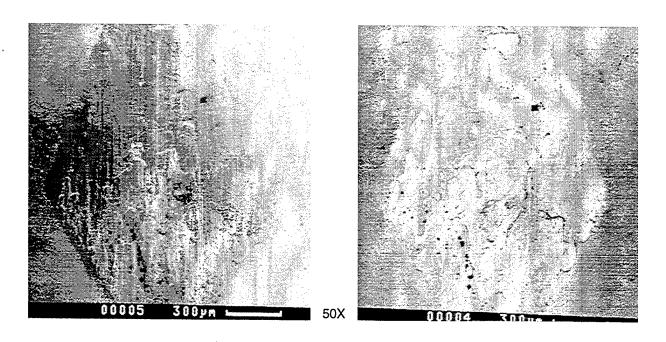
SEM Secondary and Backscatter Photos of Roller Assembly Damage. Smeared areas indicate M50 material deposited from the race.
